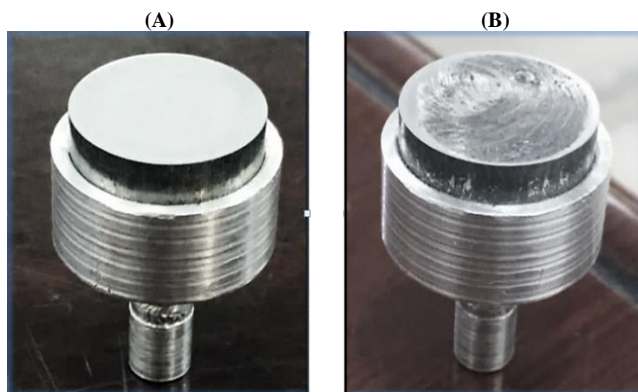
Wear Test Samples: A) before Testing, B) after Testing.
